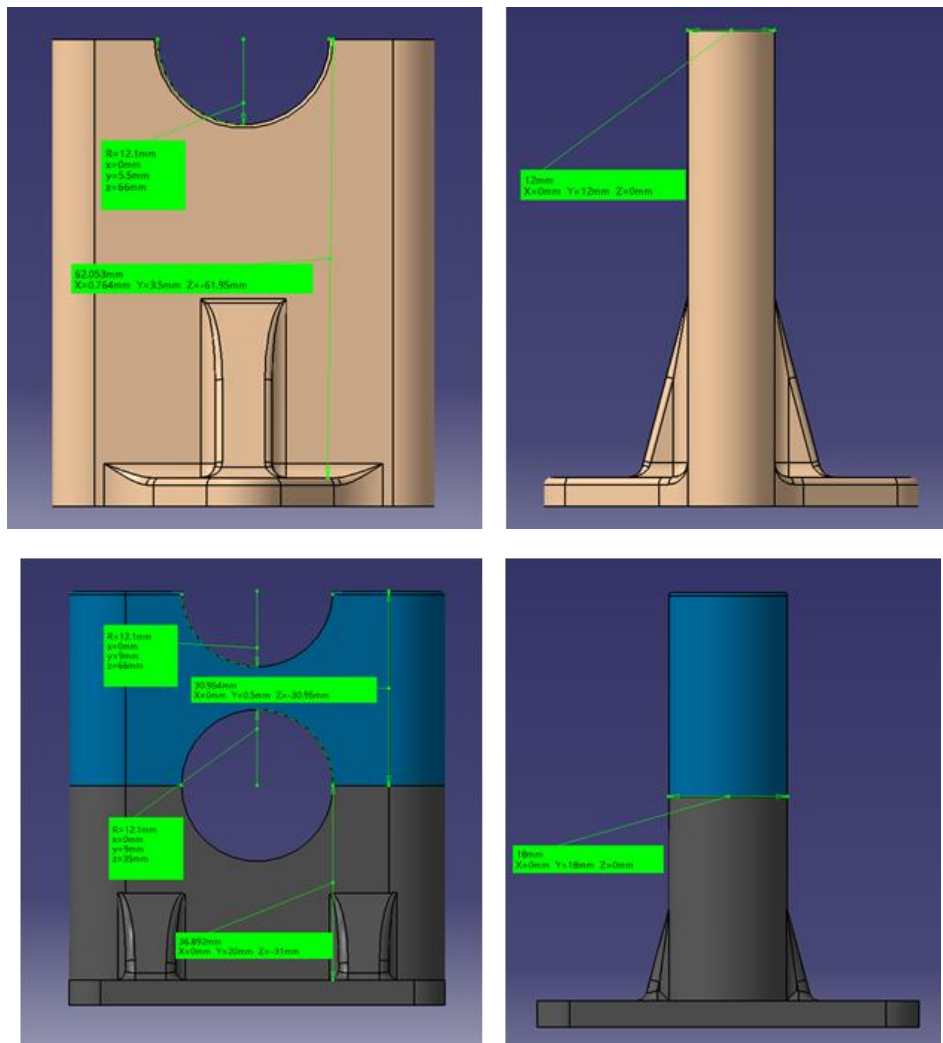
Existing (left) and modified (right) steering rack housing lower supports - Solution 5
